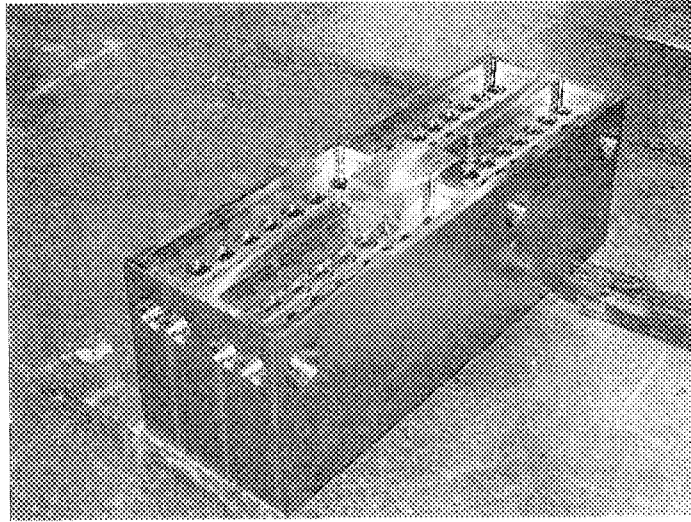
Machining of the front headers, poloidal headers and toroidal coolant path
